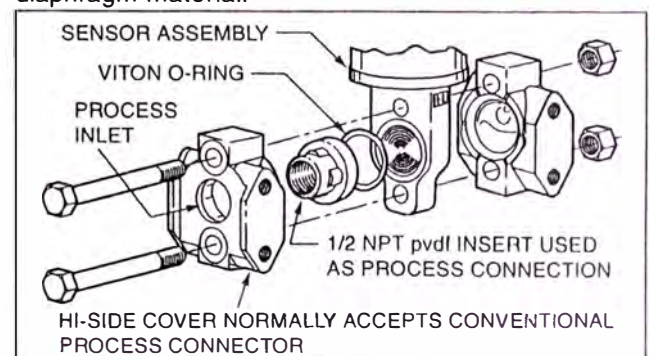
Bracket-Mounted Transmitter Shown with 1/2 NPT pvdf Insert Installed in HI-Side Cover
